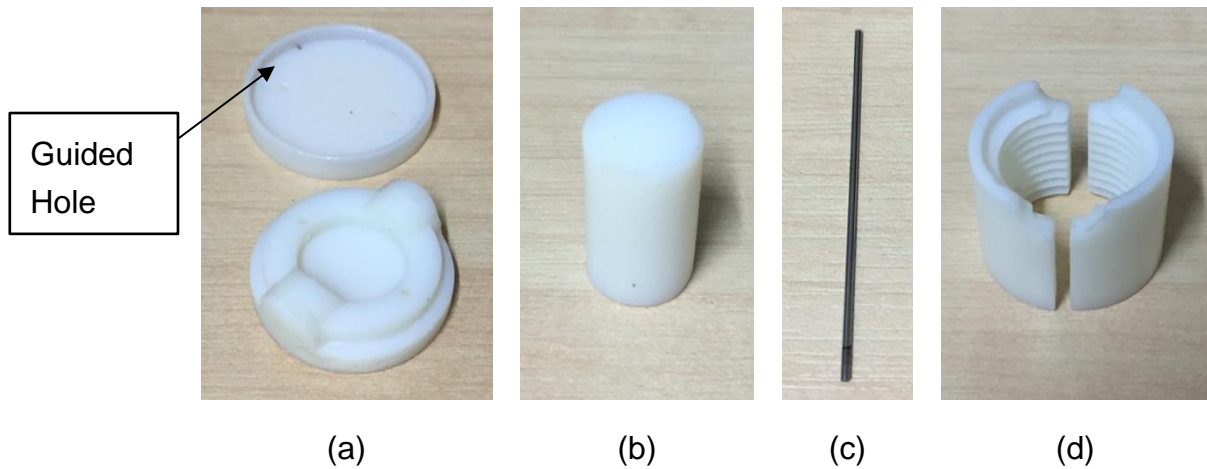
Components of the mould for the fabrication of the bellows-like structure. (a) Top and bottom cap. (b) Cylinder for creating the space for the revolute joint. (c) Stainless steel pin. (d) Two half cylindrical moulds.
